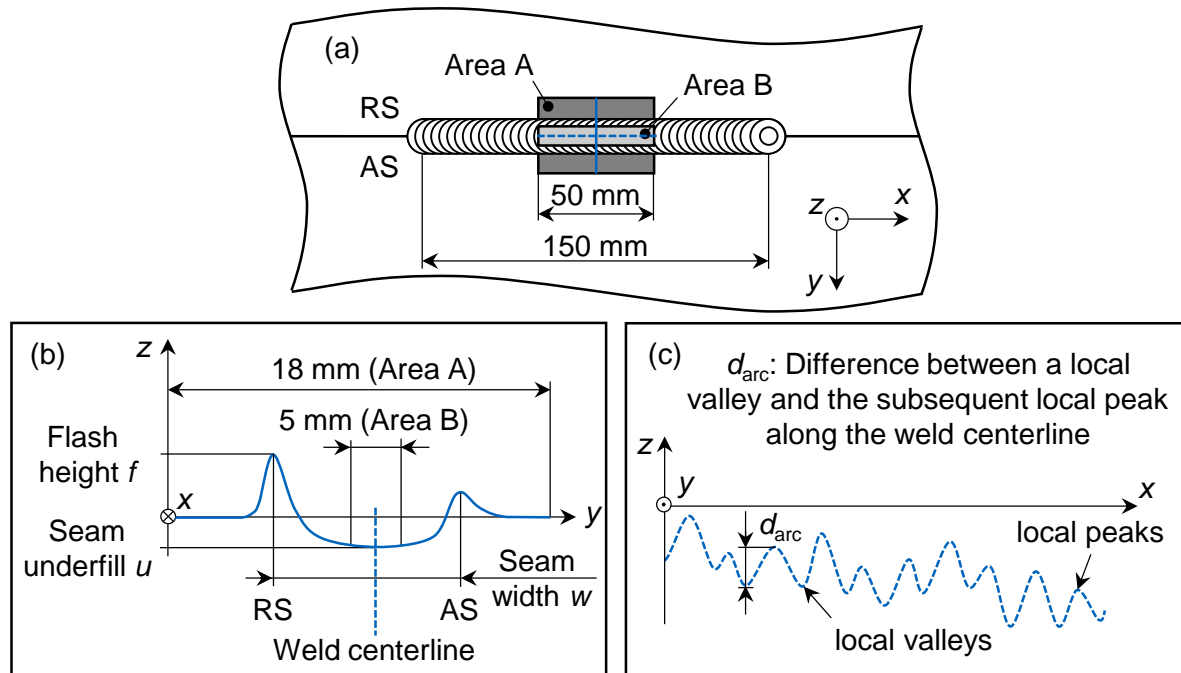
(a) Section of the sheet surface containing the friction stir weld; (b) exemplary cross section of the surface topography; (c) topography along the weld centerline (based on HARTL ET AL. 2019a)
